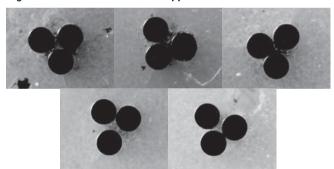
Geometrical location of wires in steel cord 3×0.30 HT FRP
